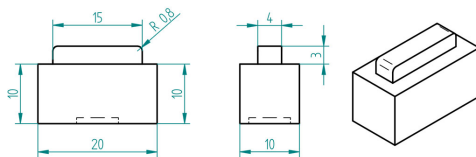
Sketch of the pad geometry with a rounded edge of 0.8 mm.
